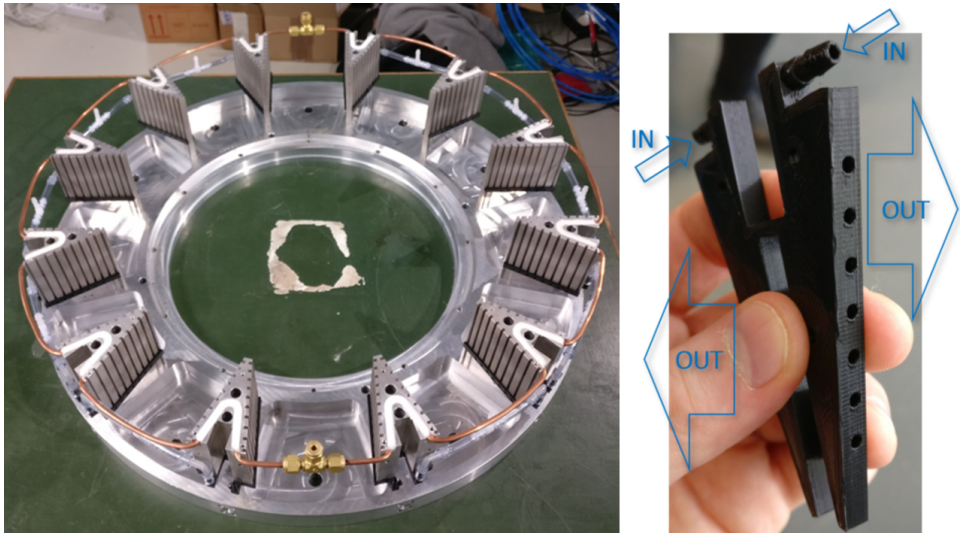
Left: the 4 mm Cu pipes of the liquid cooling system directly embedded in the FE holders. Right: one 3D-printed piece used to flush dry air inside the endcaps.
